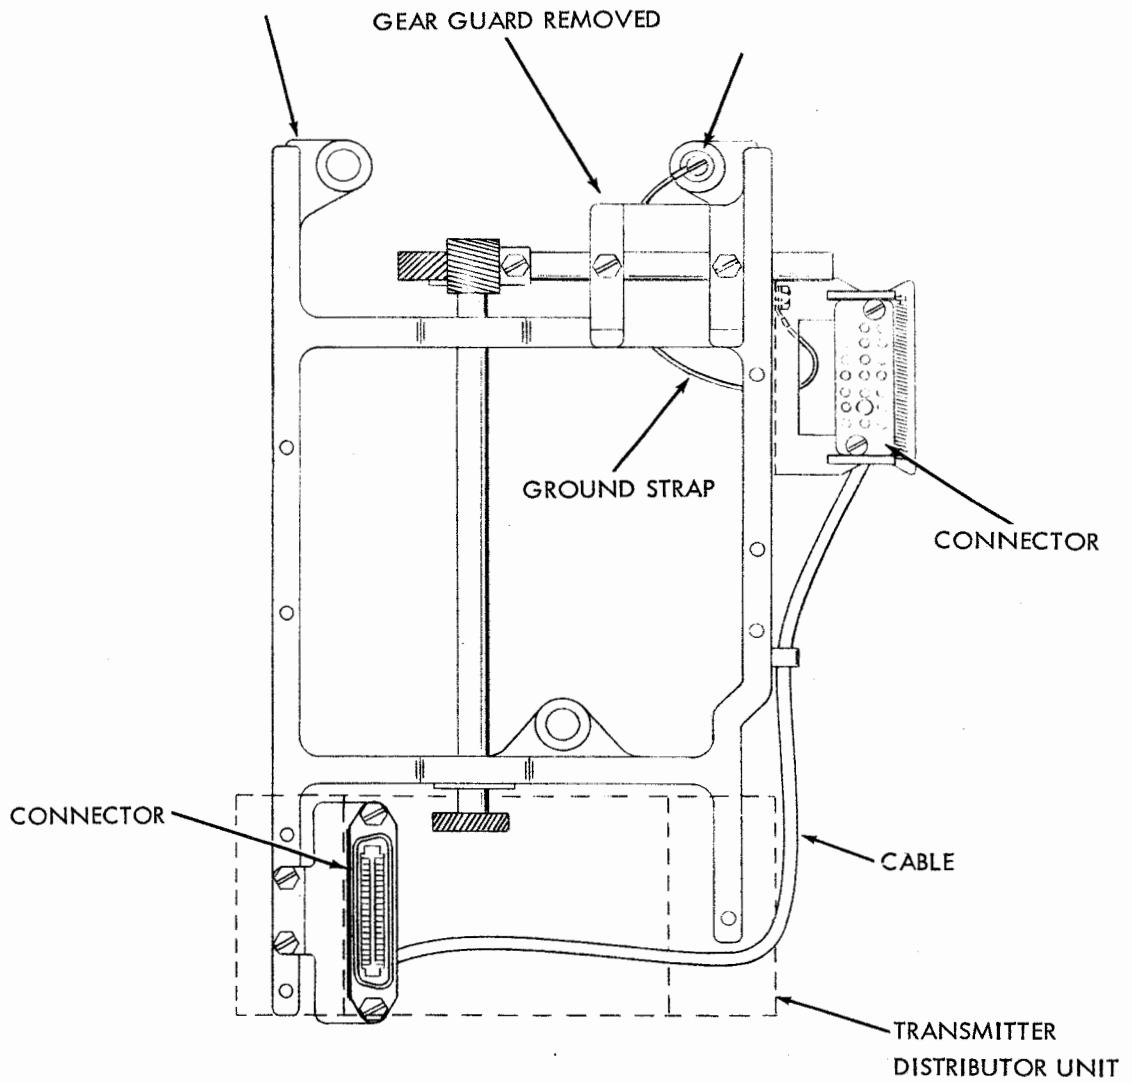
Transmitter Distributor Unit and Base Arrangement
